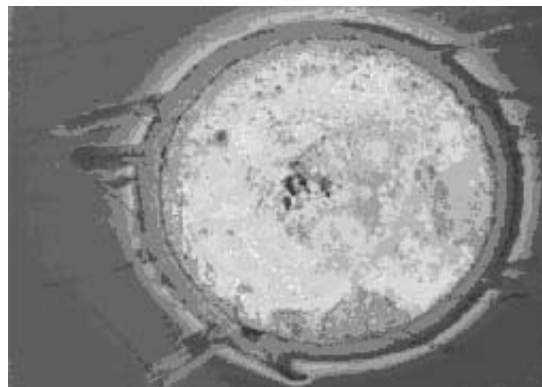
Cold joint with a spherical inclusion for a 62Sn/36Pb/2Ag solder joint using solder paste with 45–75 $\mu$  solder powder size on HAL surface. The spherical inclusion has a diameter 60 $\mu$
